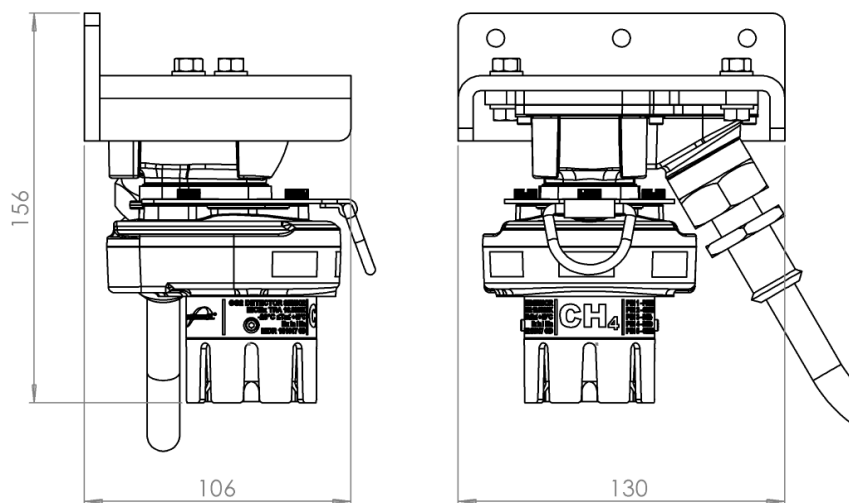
GG2 Remote Cable Assembly Dimensions (mm)
